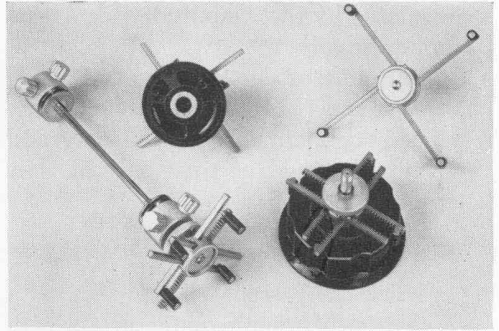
View of the coupling attachments furnished with the Sweep Drive. At left is the coupling shaft, to which has been attached the universal clutch. The other views show the clutch and the clutch attached to a knob.
